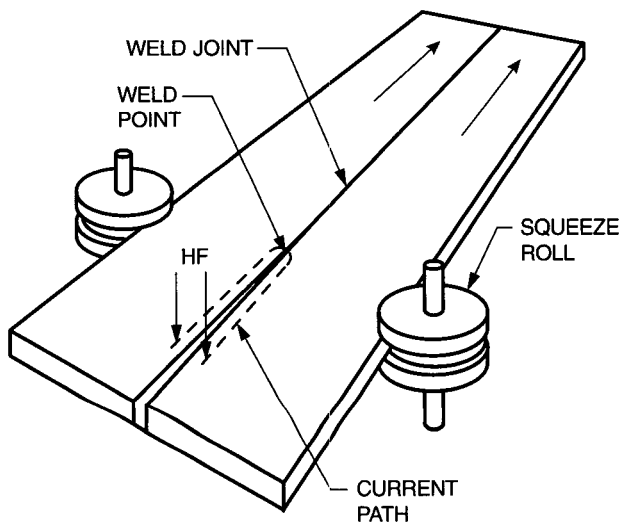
Butt Joint Made by High-Frequency Upset Welding
